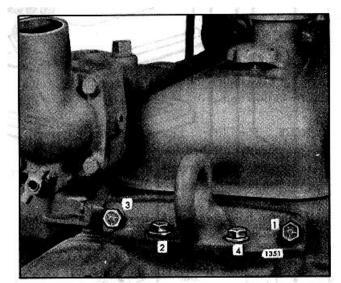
Typical Installation of Lifter Bracket and Bolt Tightening Sequence.
